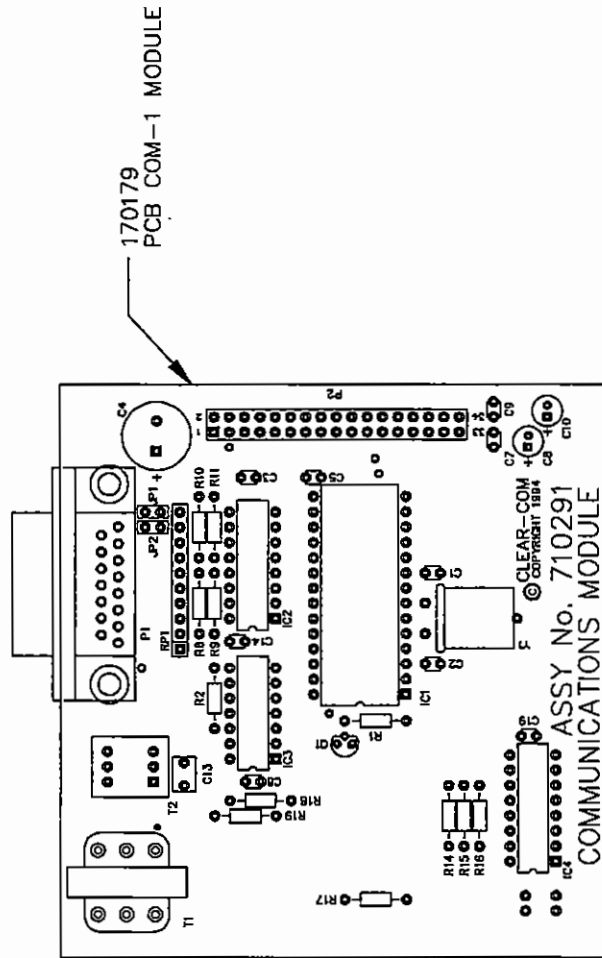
Assembly Drawing - COM-1 Communications Module Rev. A
